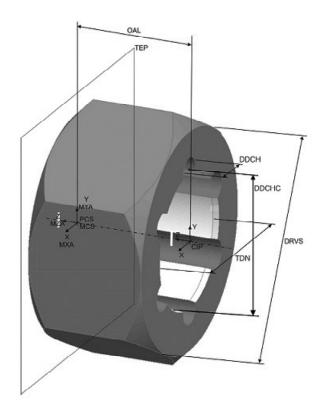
Thread-cutting die, hexagonal shape — Complete
